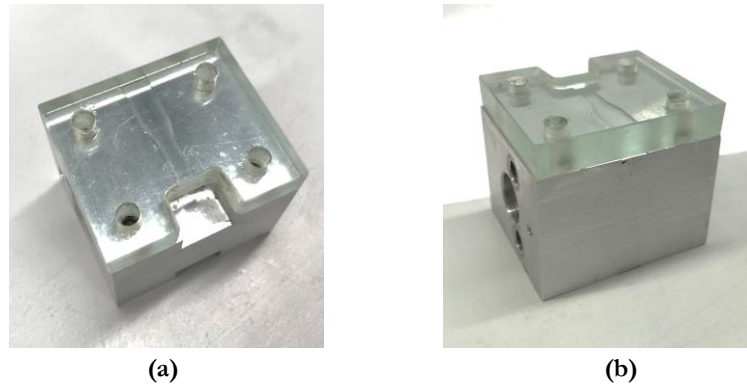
Extrusion die with aluminium channel with glass plate (a) top view and (b) inlet view.
